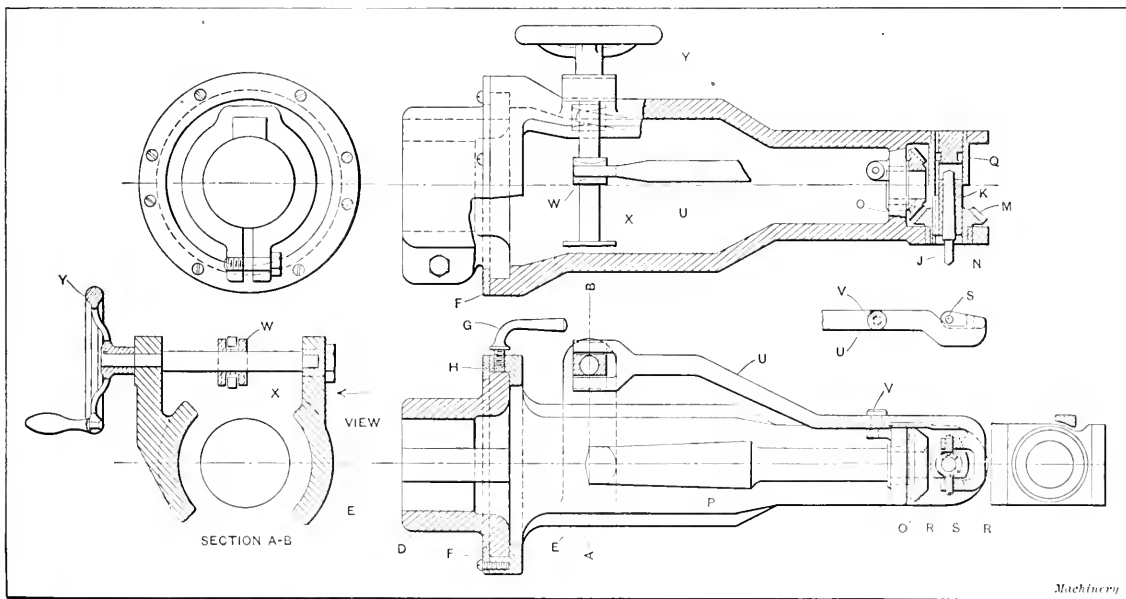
Offset Drill Head designed for drilling Horizontal Holes on Radial Drill
